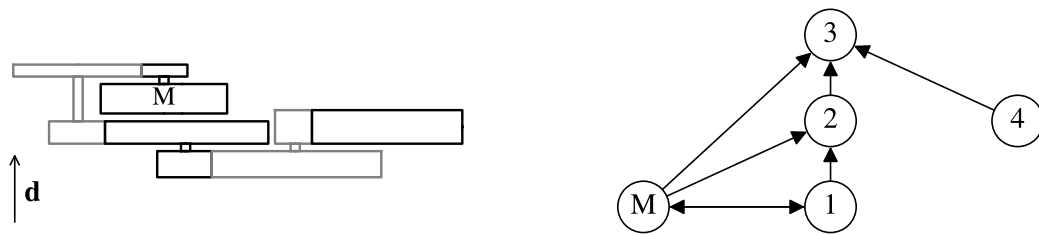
Example of a four-stage actuator with an assembly deadlock.
